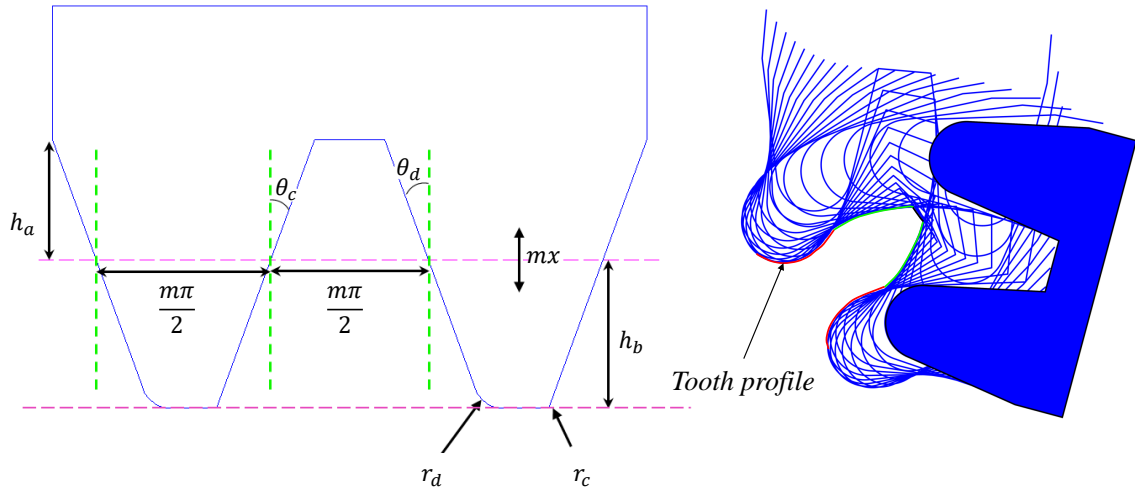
Symbolic cutting of the gear set using parametric rack cutter
